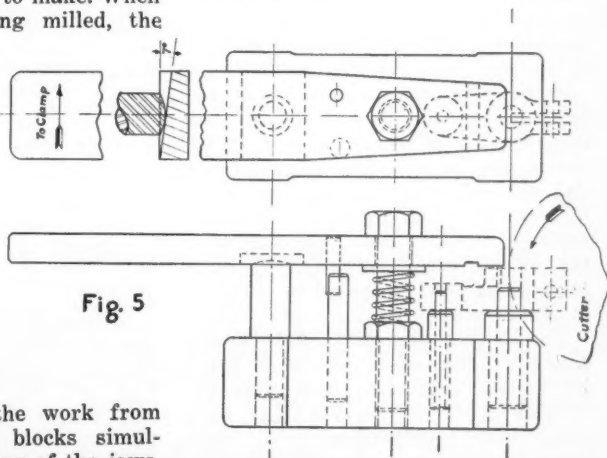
A simple, but efficient, fixture for use with a milling machine vise.
